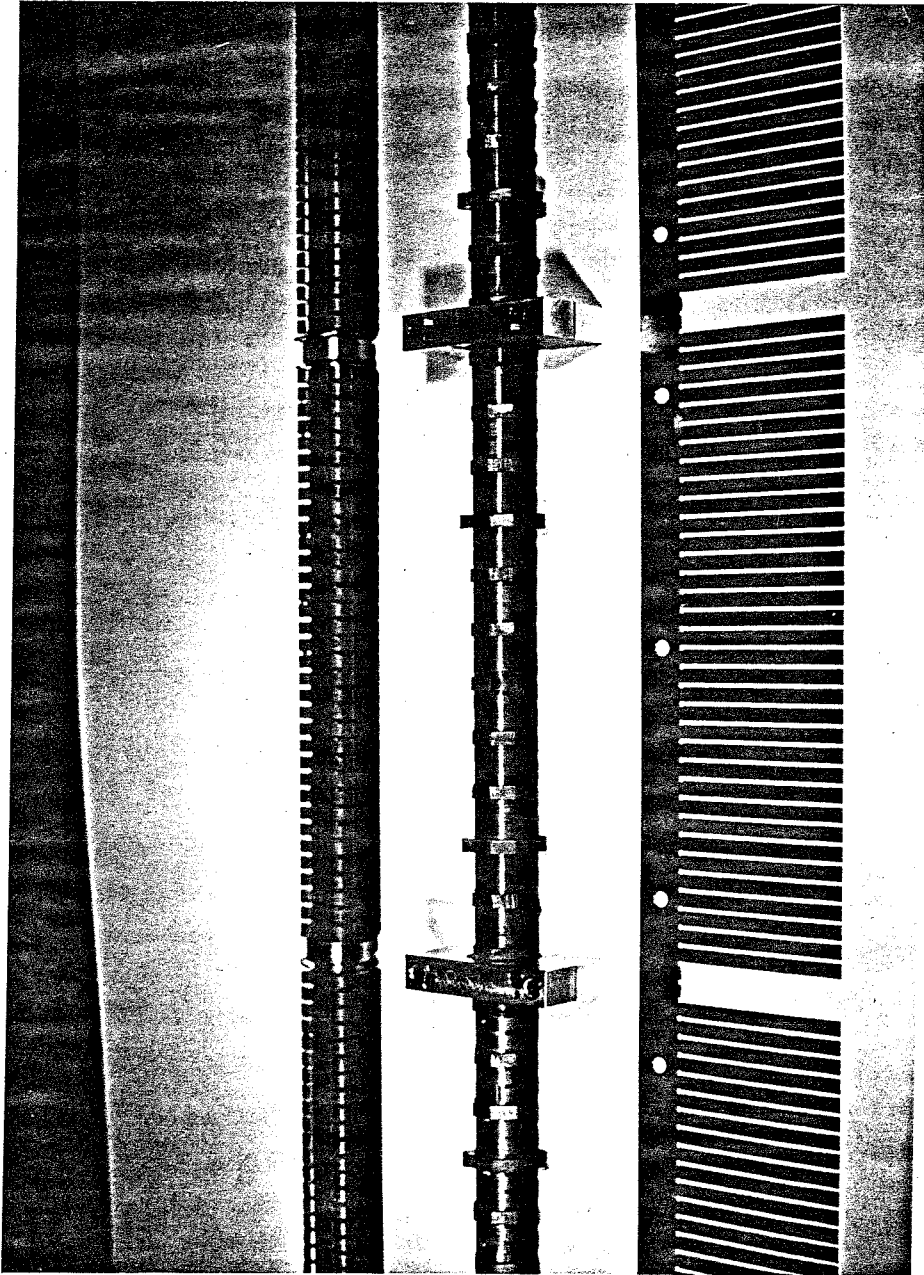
Photograph of camshaft. Top: before final machining (all cam lobes present). Note needle bearing between adjacent sleeves. Center: 9.1-cm cam after final machining, with bearing block installed. Bottom: leaf or buffer spring used between cam and pins as shown in Figure 6.
